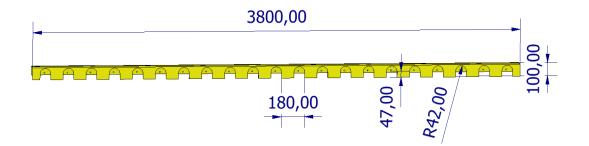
Legs of the roller conveyor that transports empty pallets. Dimensions in mm.
